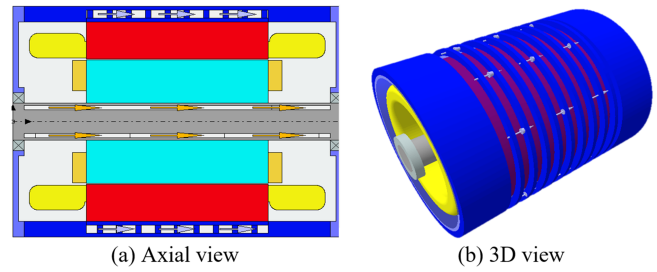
Motor cooling system (1) based on housing Water Jacket (WJ) and shaft Spiral Groove (SG).
